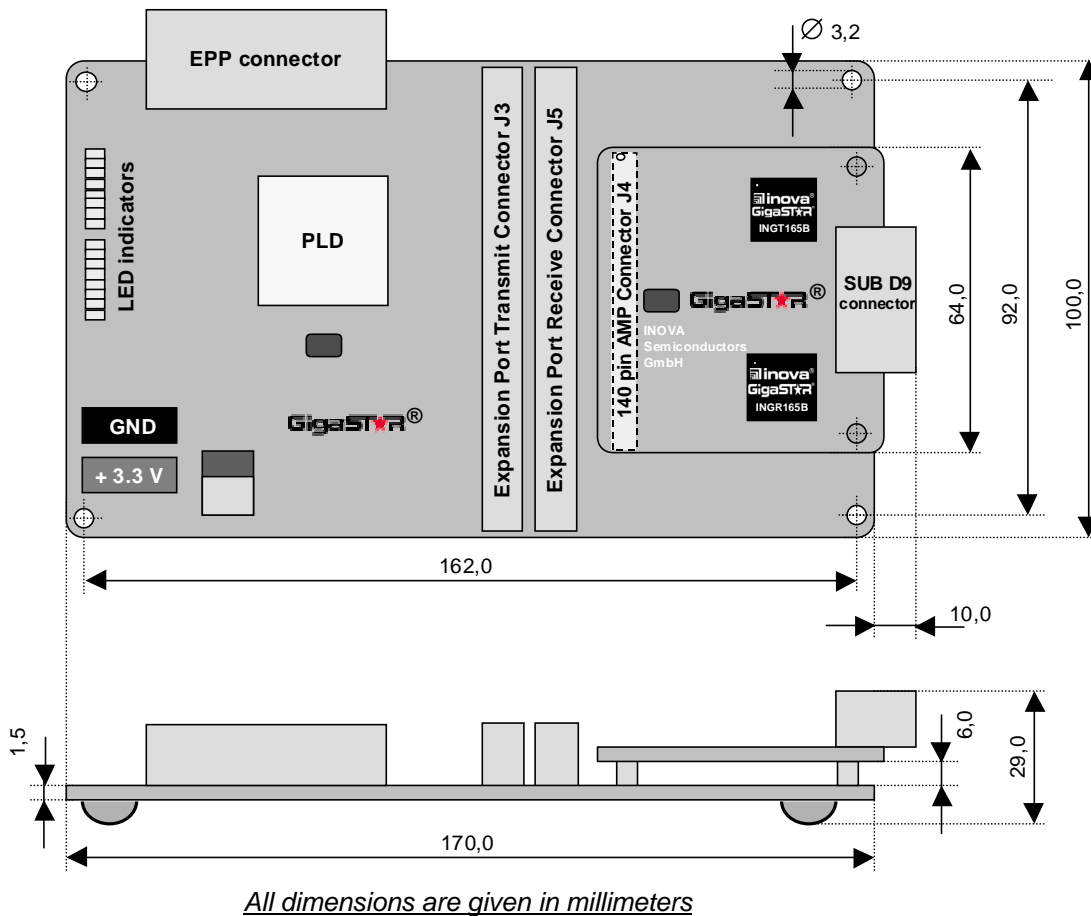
Top and side view of the Main Board (with mounted Piggyback Board) with mechanical outlines
